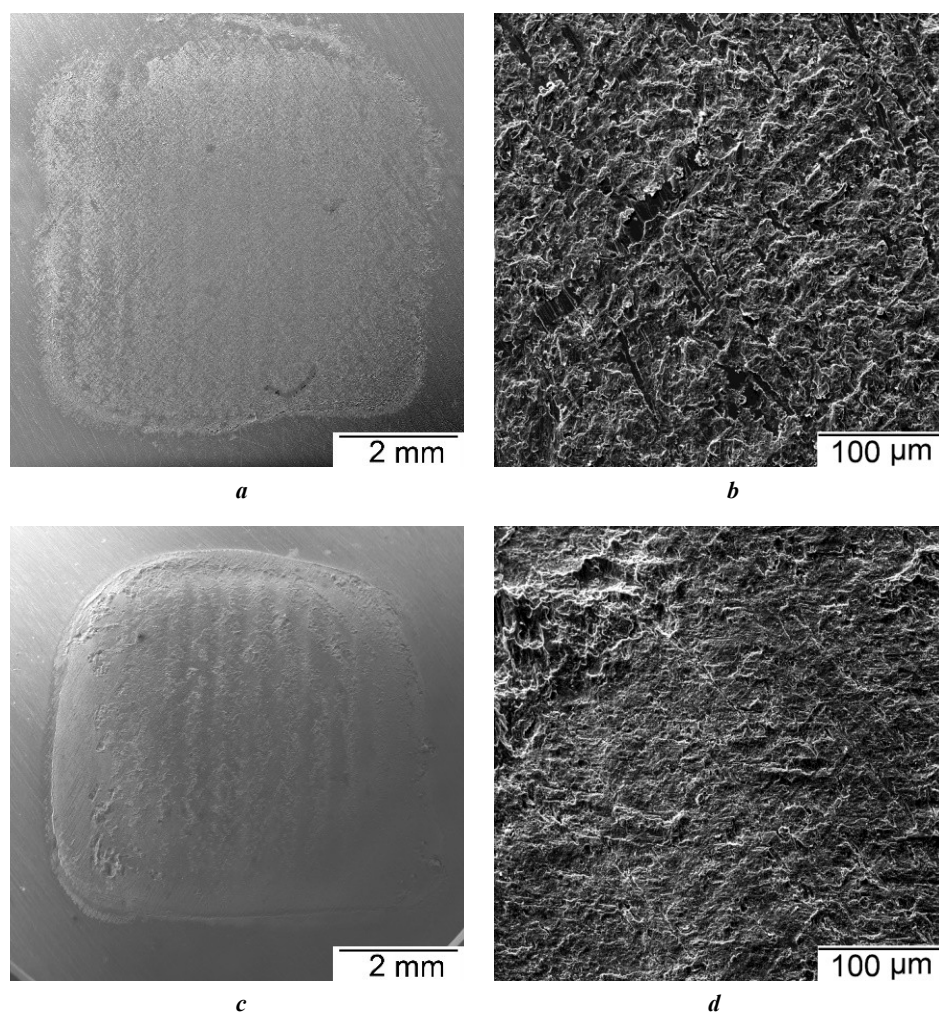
Typical images of fracture surfaces of samples produced by ultrasonic welding with a tool with a tooth height of $H=0.1$ mm:
